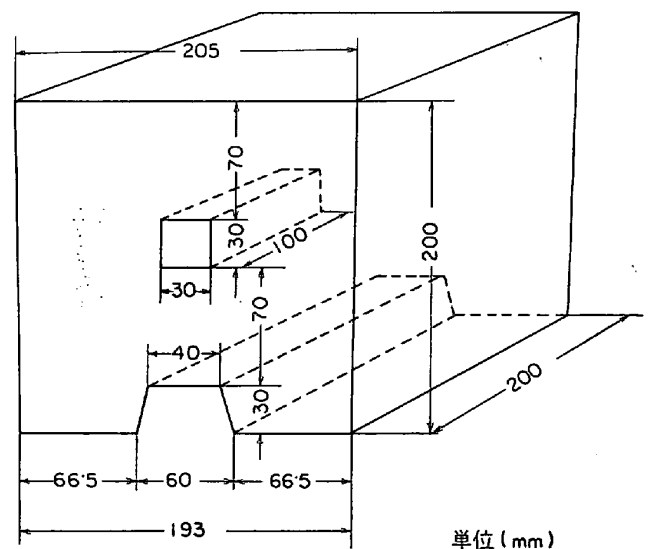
Sampling place of steel specimens in casting stage for extraction of oxide inclusions.
